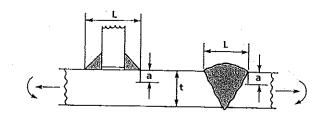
gives values of M_k in tension and bending for butt welds and non-loadcarrying fillet welds (Ref. 4:29). If the weld geometry is known in detail (root radius, toe angle, leg lengths and the thickness of adjoining parts), more exact expressions can be used (Ref. 4:43, 44, 48, 49).
